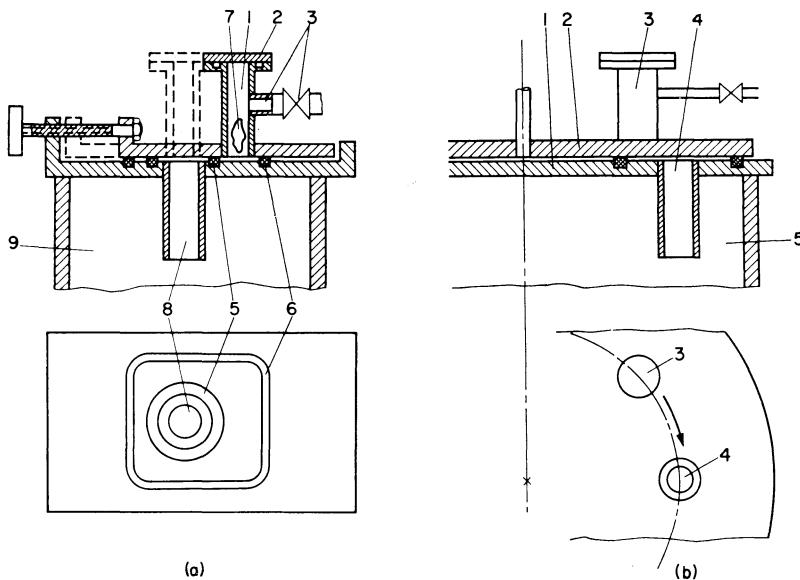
Vacuum lock with moving chamber: (a) translation; (b) rotation
